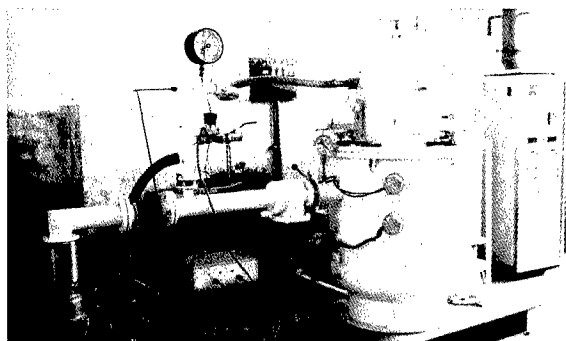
The equipment used for remelt, degassing and vacuum differential pressure casting of particle reinforced aluminum matrix composites.
